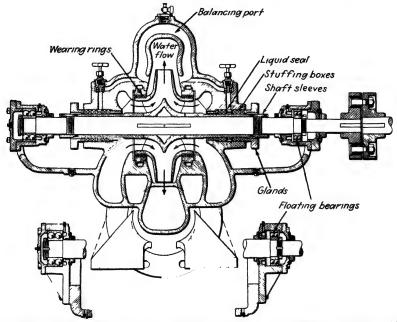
Cross-sectional view to illustrate construction of Cameron ALV and AFC double-suction, volute pumps.
